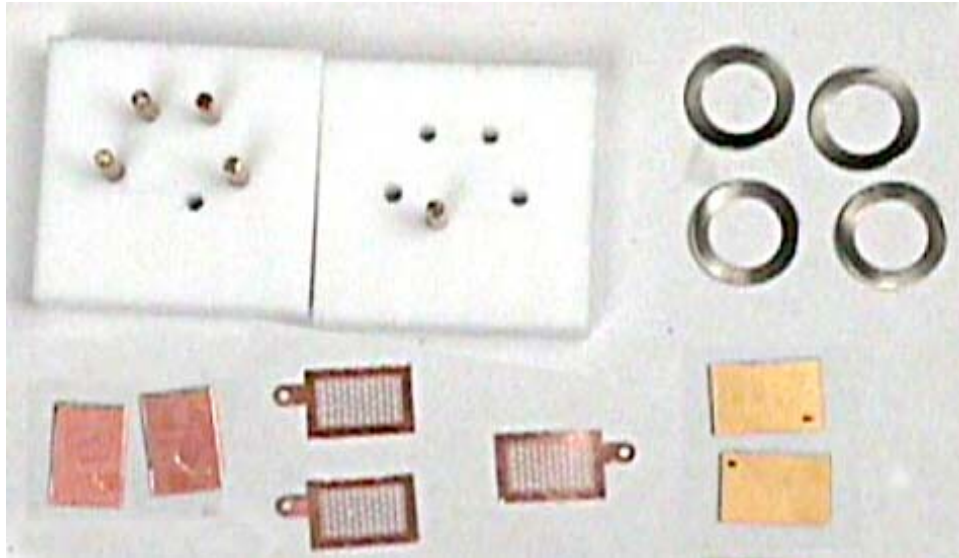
Components for fabricating single-crystal stack. Bottom from left are two cover plates, three perforated metal electrodes, and two crystal wafers. Top is the gluing fixture and disk springs
